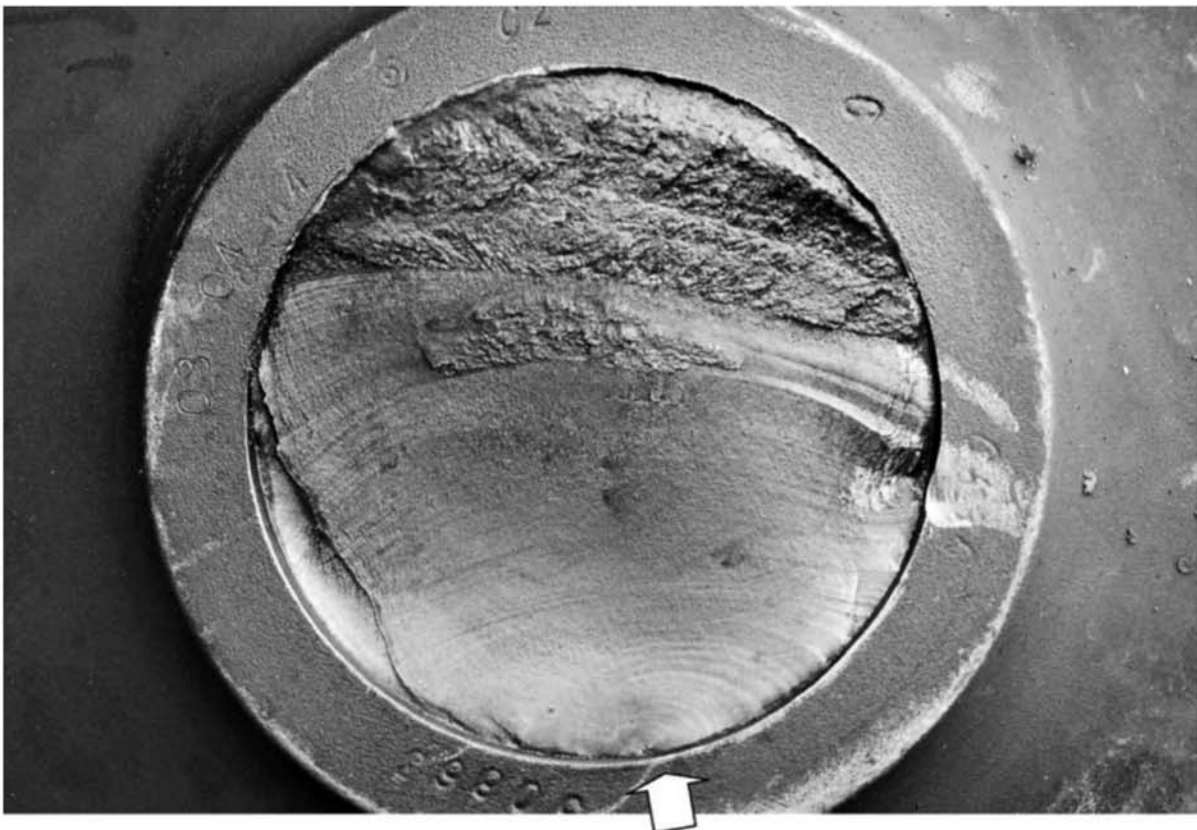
Fatigue failure in a forged railway axle. The wheel is still mounted in the axle. The fracture started at the radius transition corresponding to the area of the axis where the wheel is assembled. The arrow indicates the initiation. Beach marks indicate that the crack propagated by fatigue. The region on the top of the image fractured due to lack of cross section to resist the applied stresses. Courtesy of MRS Logística S.A., RJ, Brazil.
